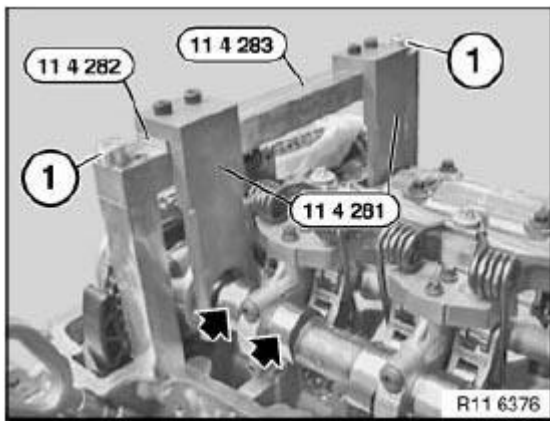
Cylinder Head Bolts And Special Tools (11 4 282) And (11 4 281)
